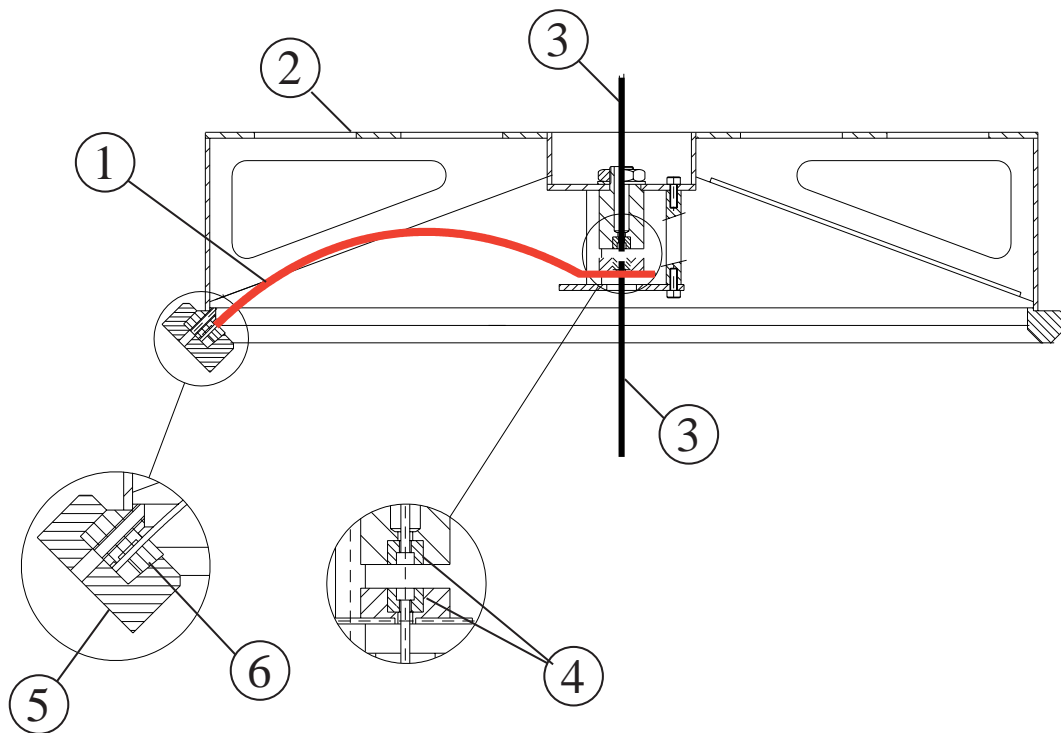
Assembly of MGASF. Only one blade is visible in this cross section.
